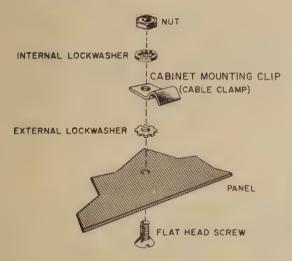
HOW TO ASSEMBLE THE CABINET CLAMP
